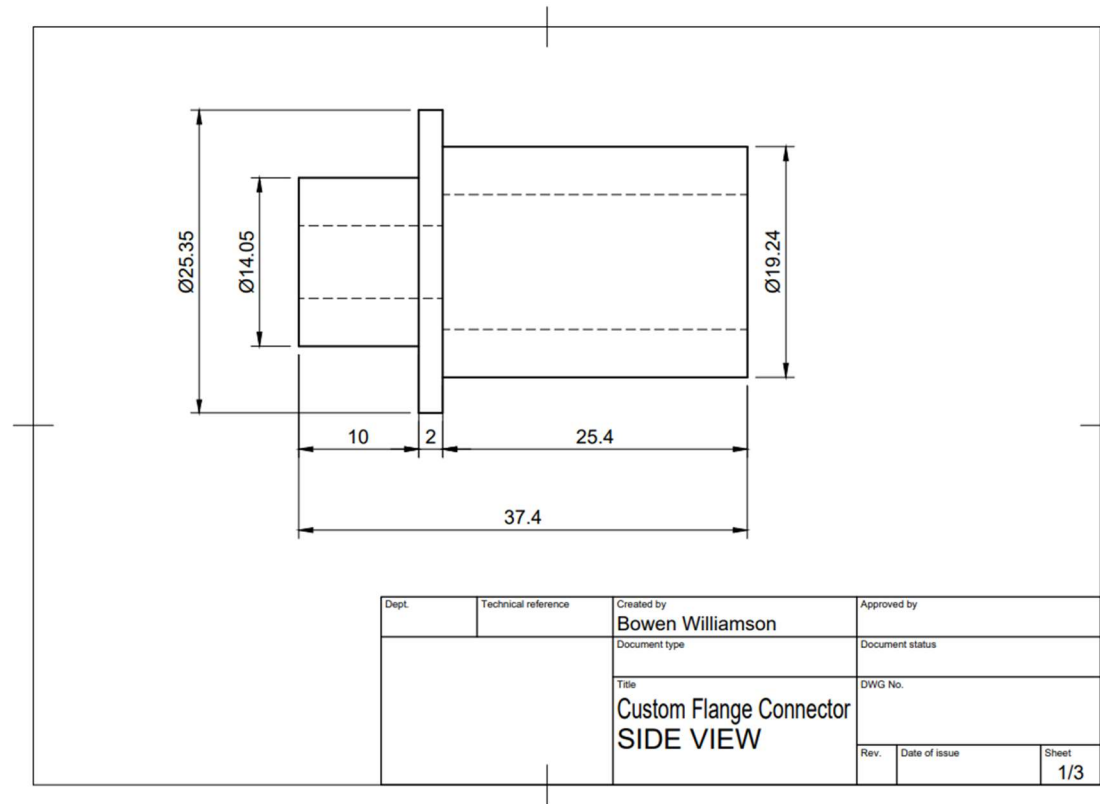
Manufacturing Drawing of part SS#2-P#14- Flange Coupling
